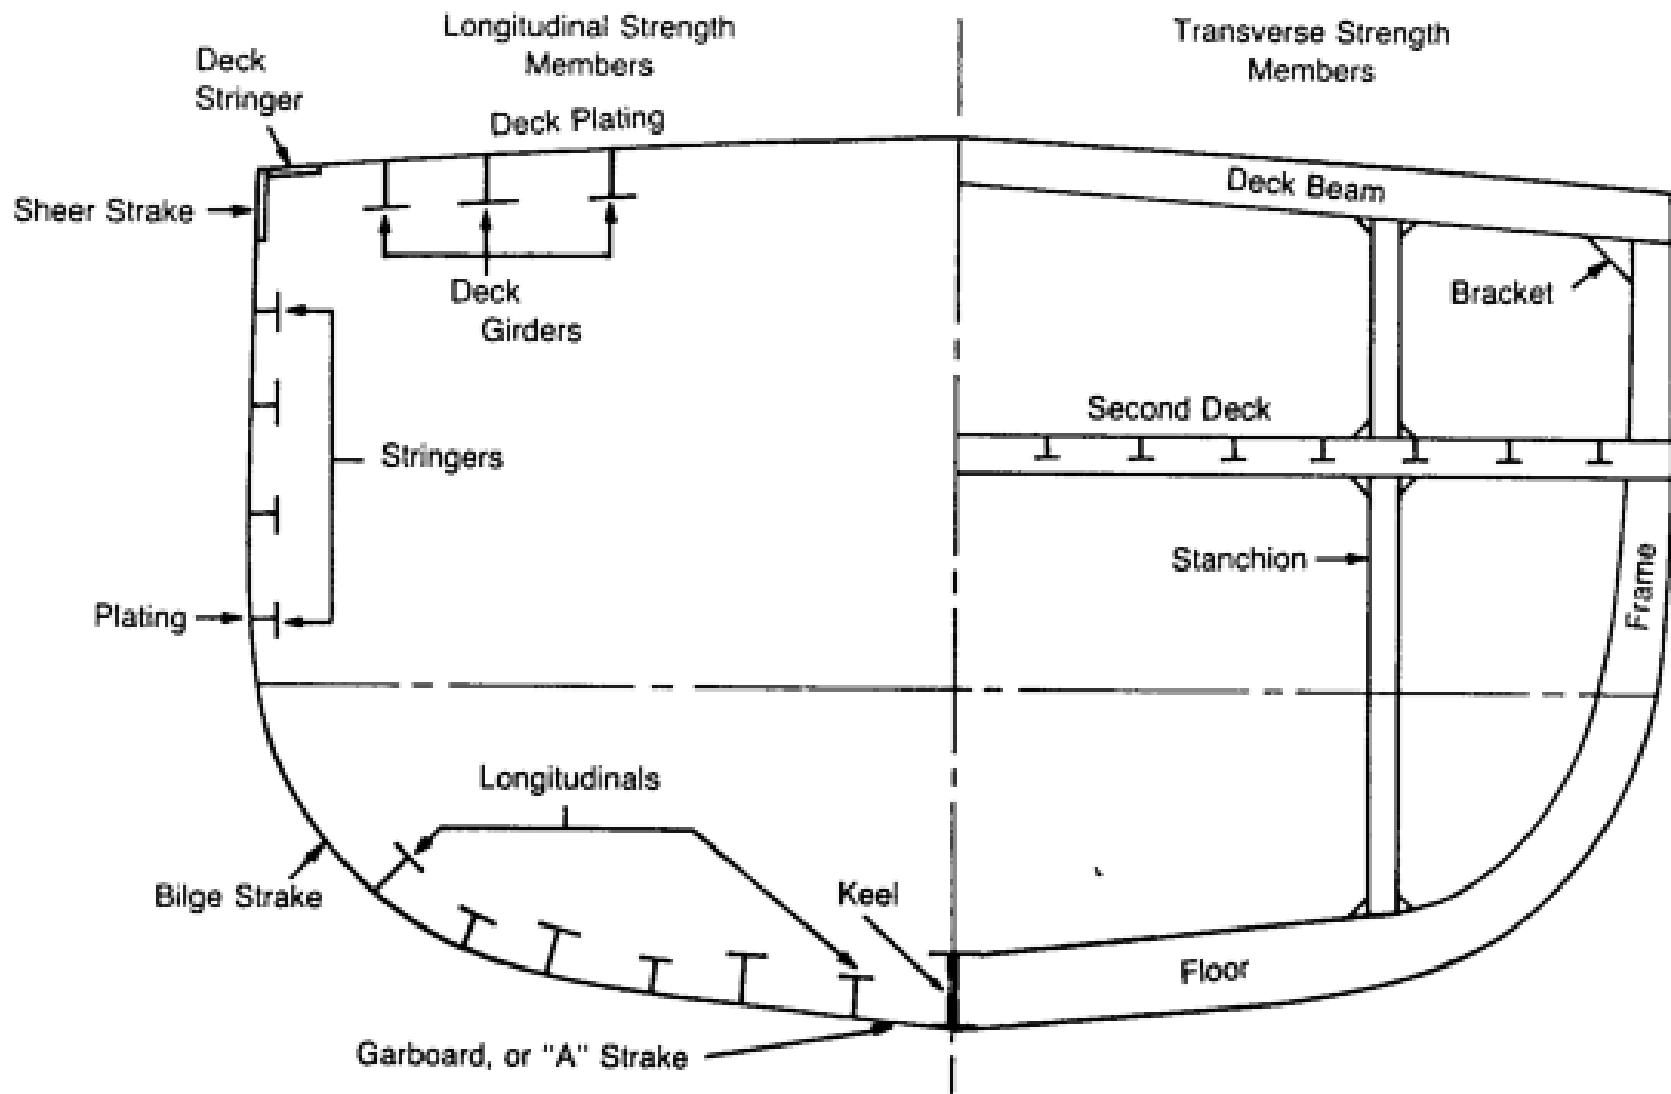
Typical Transverse and Longitudinal Strength Members
